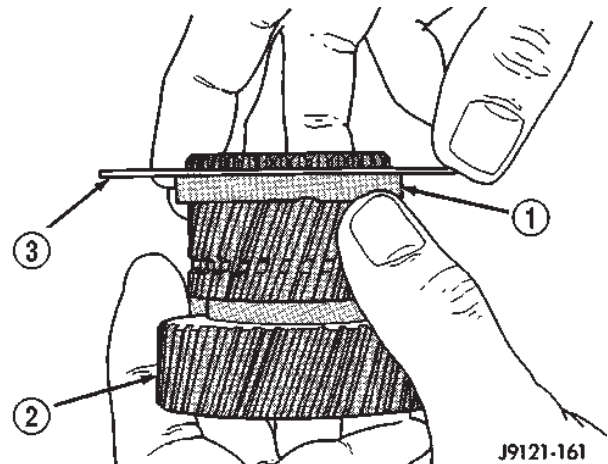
Installing Driving Shell Front Thrust Plate On Sun Gear
